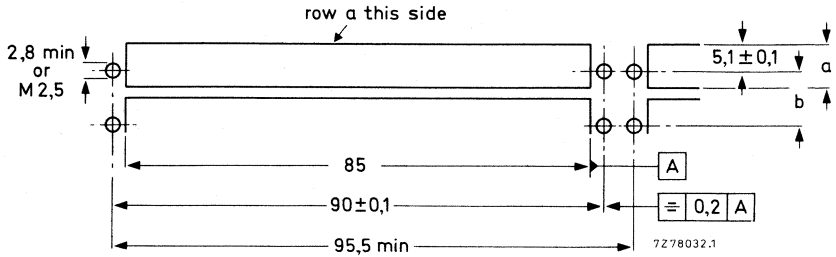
Panel cut-out; see Table 4 for dimensions a and b.
